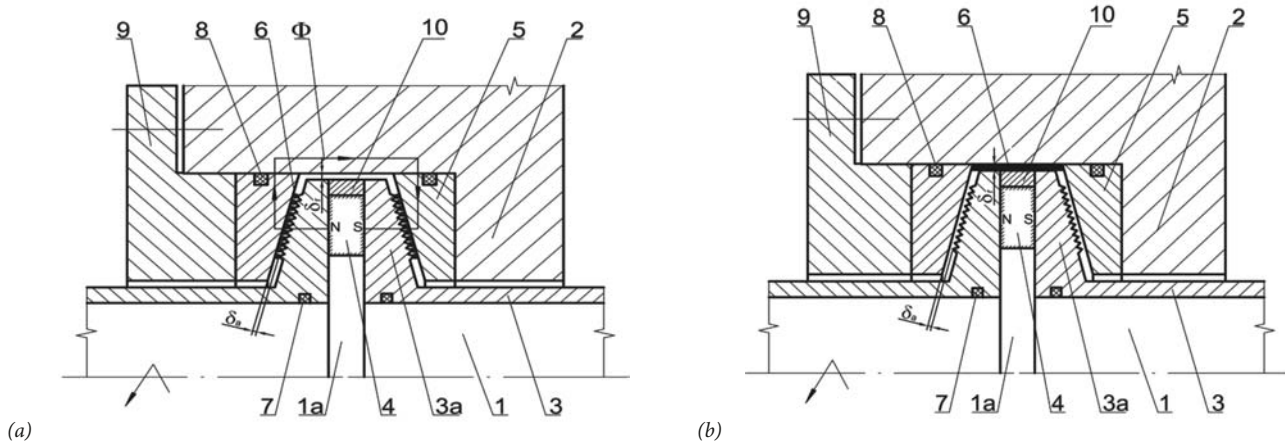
Centrifugal magnetic fluid seal with disc of vee-shaped cross-section and rotary magnetic system (a) at low rotating shaft speed, (b) at high rotating shaft speed: 1 - rotating shaft, 1a - flange of shaft, 2 - housing, 3 - pole piece, 3a - flange, 4 - permanent magnet, 5 - ring of trapezoidal cross-section, 6 - magnetic fluid, 7, 8 - "O" - rings seals, 9 - cover, 10 - non-magnetic ring, δ_a - axial sealing gap, δ_r - radial sealing gap, Φ - closed magnetic circuit
